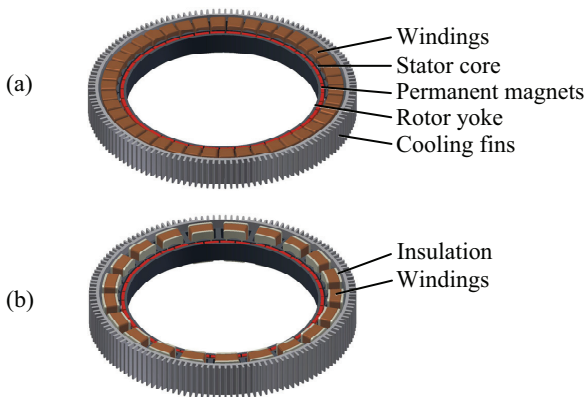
CAD drawing of (a) the LV machine and (b) the MV machine with extra insulation.
